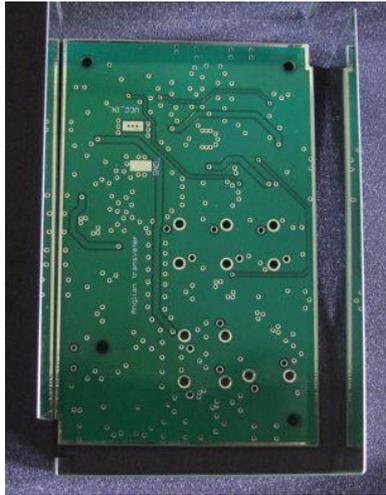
A Assembled Anglian 3L PCB. Only the SMD parts on the top of the board have been placed. The board is now ready to be seam soldered into the box.
